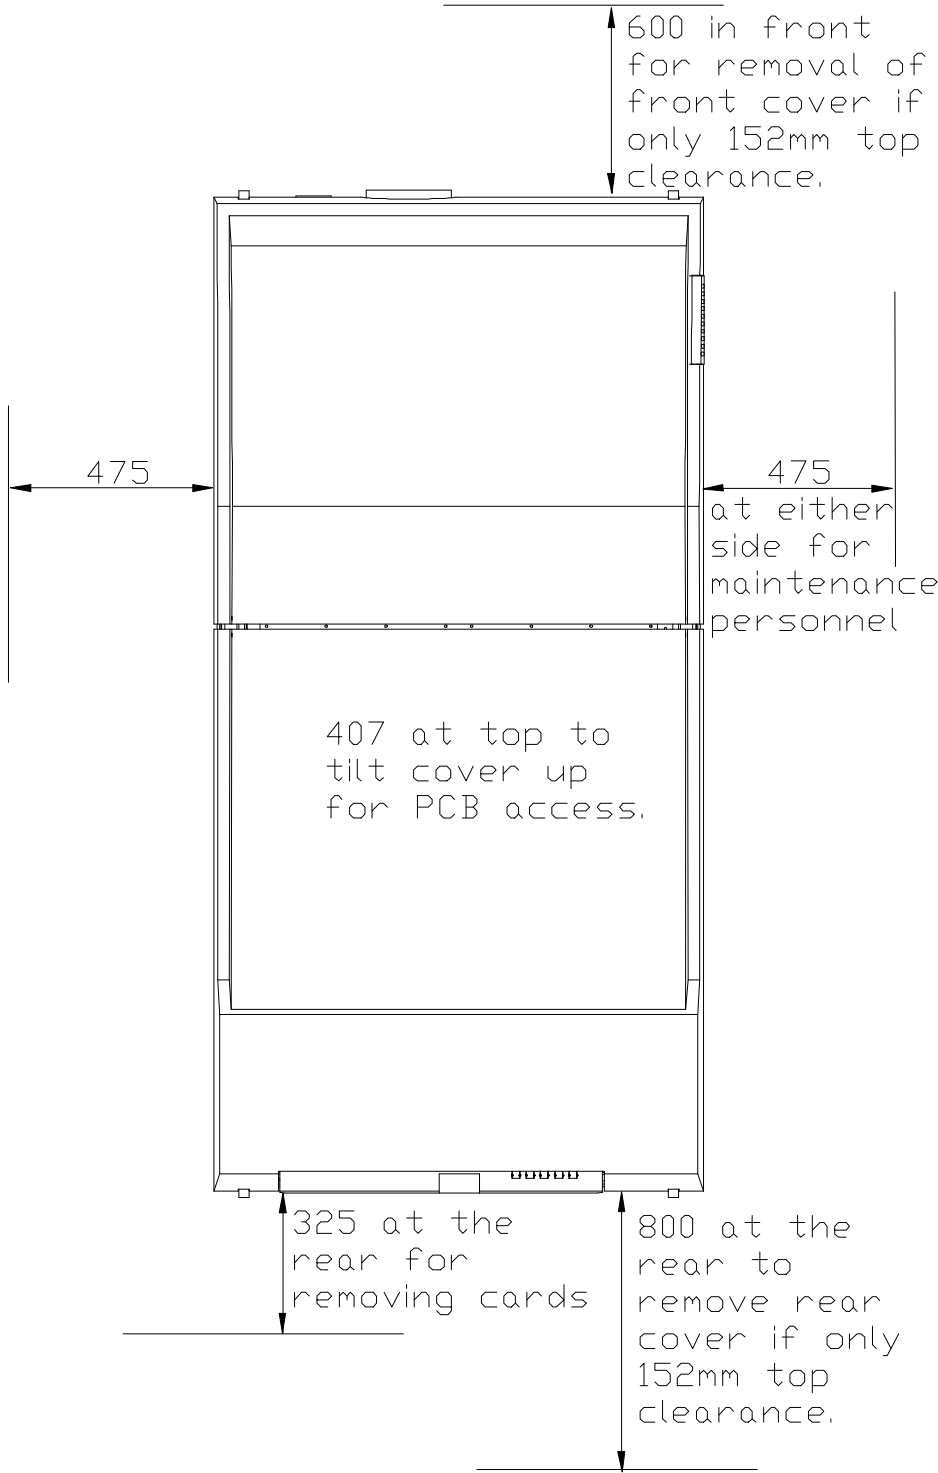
Clearances (in mm) for cover removal and physical access.
